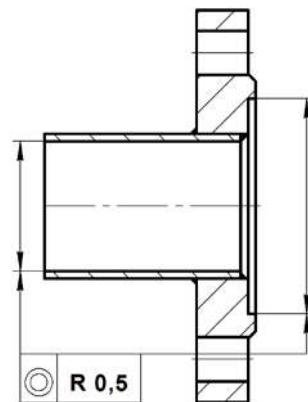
Installation scheme for Dn65 and less using straight sections mounting kit
